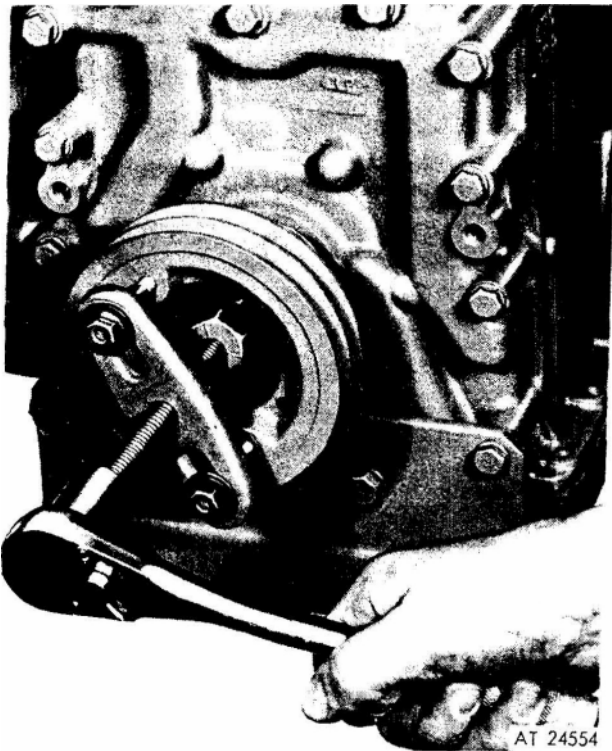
Removing crankshaft pulley using puller J 4794-01.
